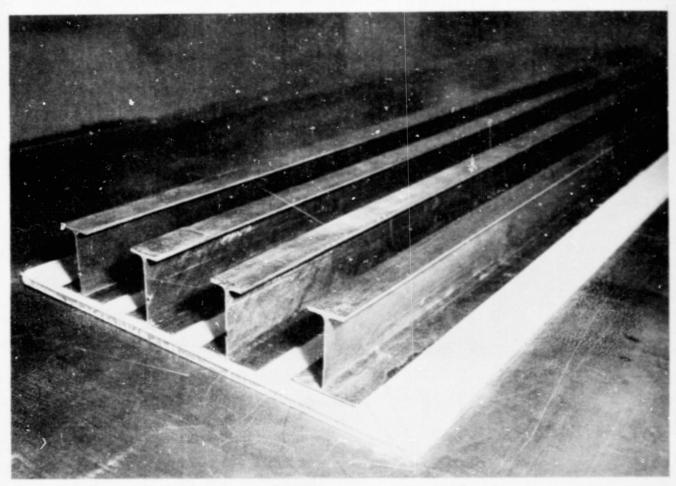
"I" Stringers in Dry Fit Position on Skin Assembly
